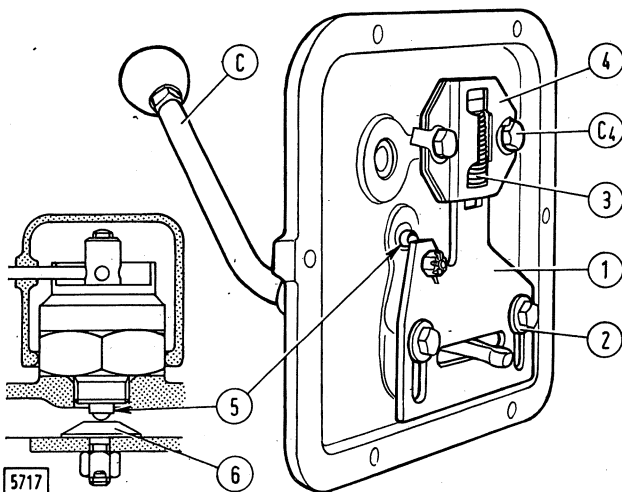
Gearshift lever and gear selector mechanism. C. Gearshift lever. - C₄. Bracket attaching cap screws. - 1. Selector plate. - 2. Spacers. - 3 and 4. Selector plate automatic return spring and brackets. - 5. Engine starting safety button. - 6. Button (5) control.
